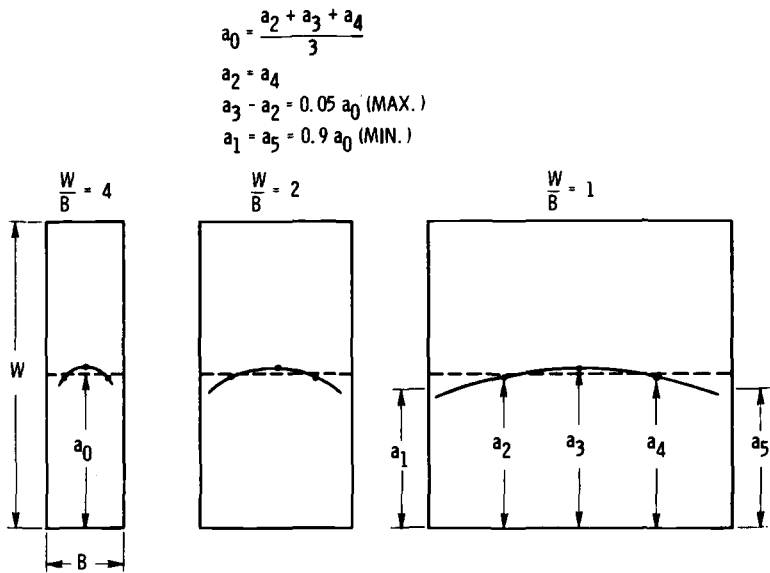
Schematic illustration of crack front curvature limits of ASTM Method E 399-74 based on Q_0 crack length.
